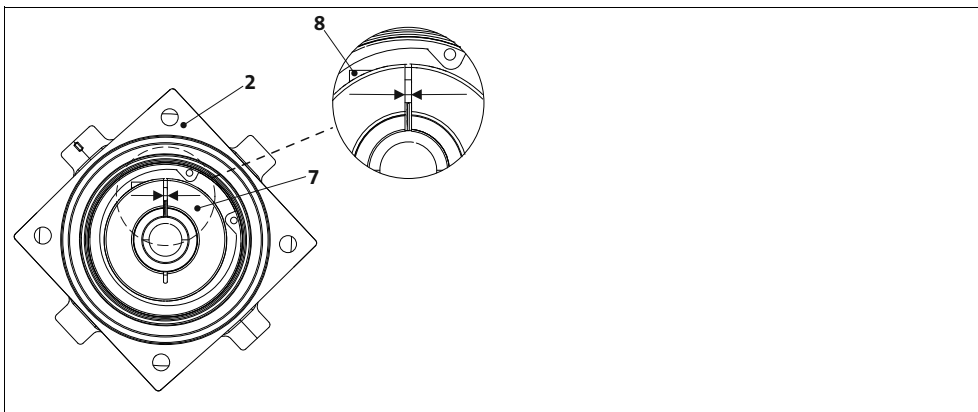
Assignment: Motor shaft, clamping ring and mounting hole
